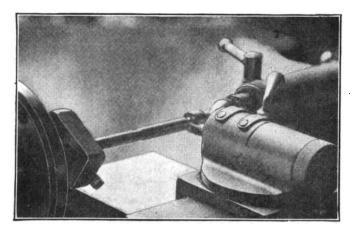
FINISH-TURNING SPINDLE FOR THREADING
